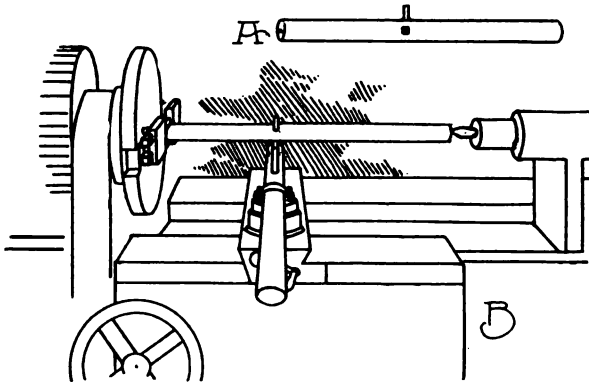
How to Cut Keyways in Shafts by Utilizing a Special Fixture on a Lathe.
